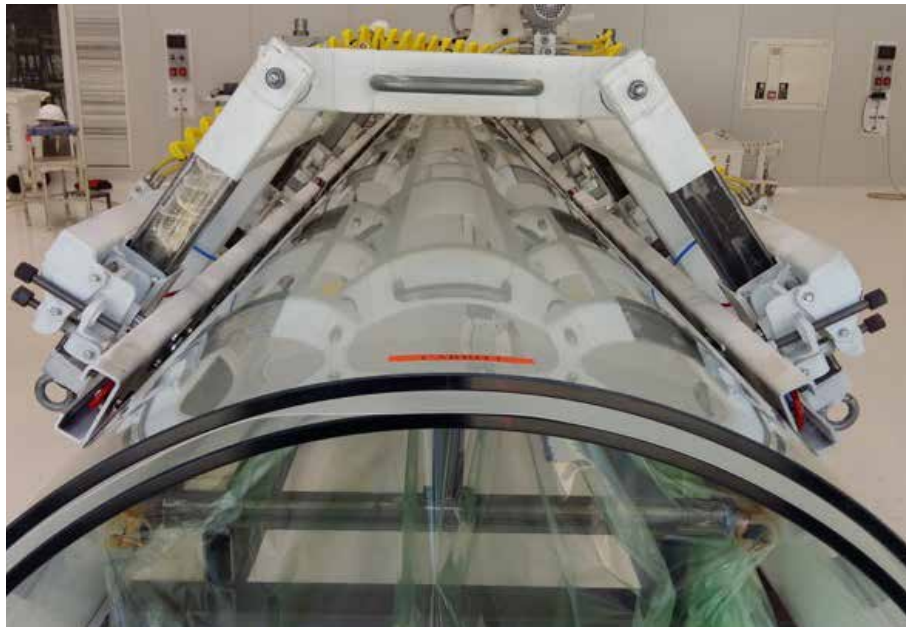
Assembly of the tubes with Interlayer prior to lamination process (Cricursa)
